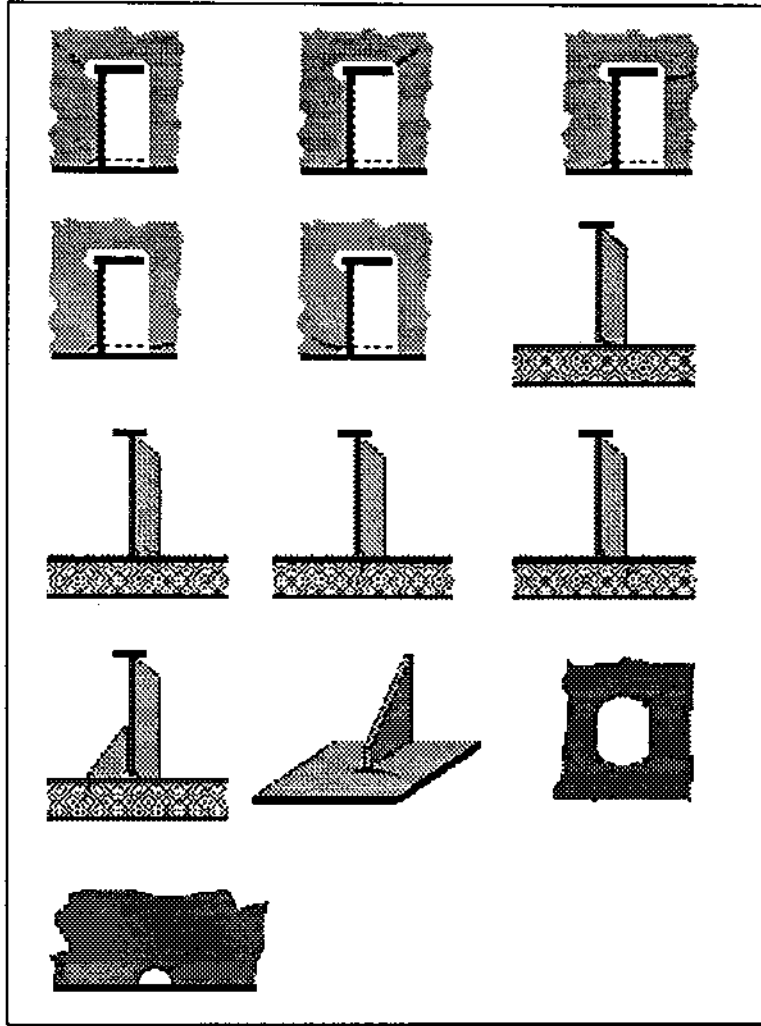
There are 13 types of pre-defined cracked structural details.
